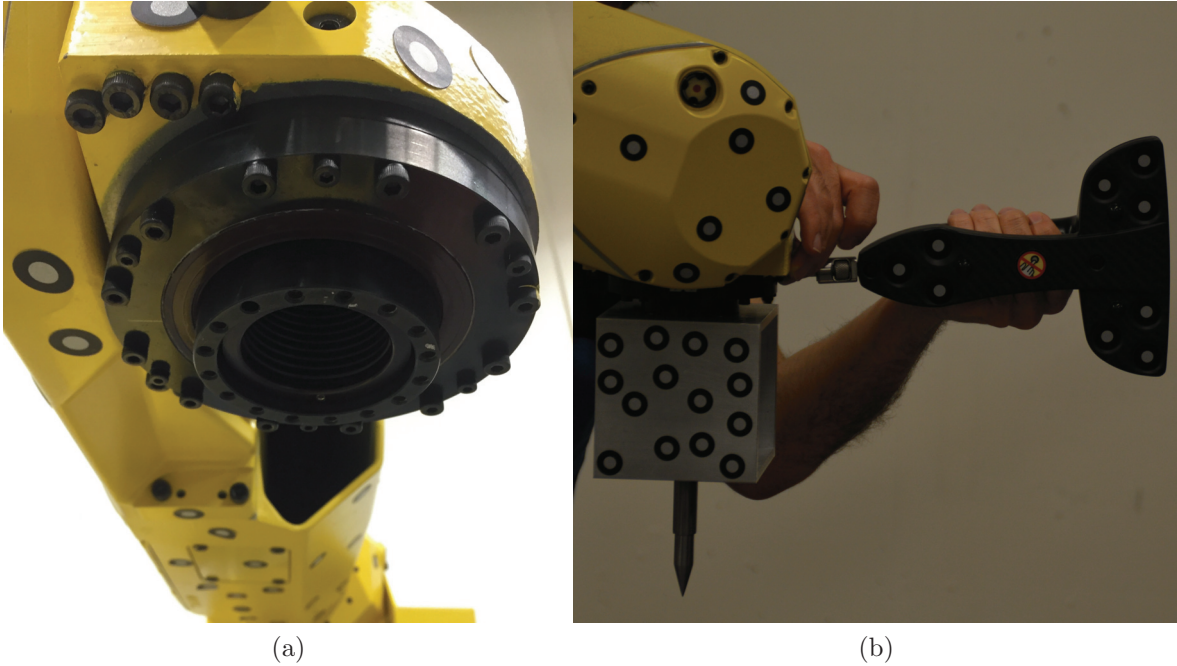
(a) Robot flange and (b) probing flange to find original tool frame
